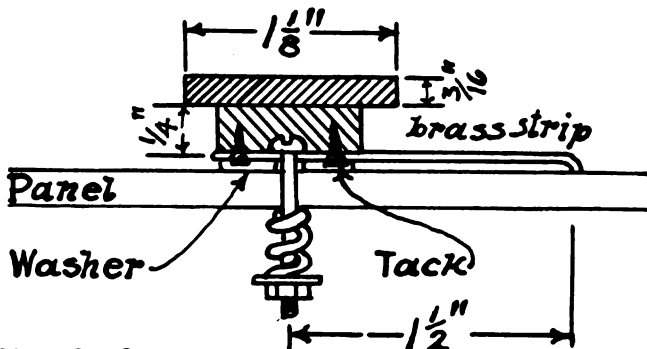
, Cross section of switch showing how knob and bolt are joined to brass strip
